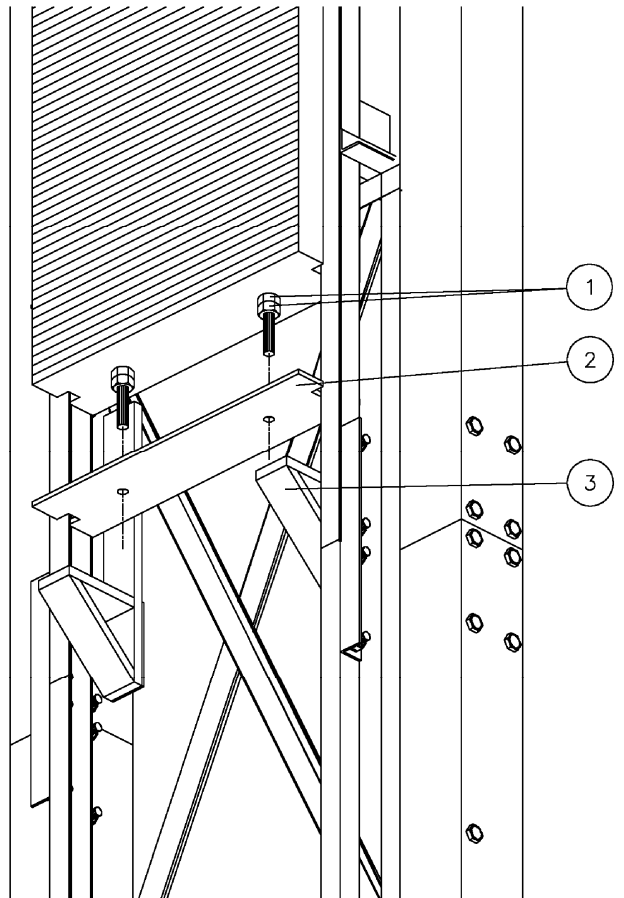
Removing the counter weight hangers and bottom counter weight plate, and installation of a lock nut on the threaded shaft. Looking from behind the guide rails.
